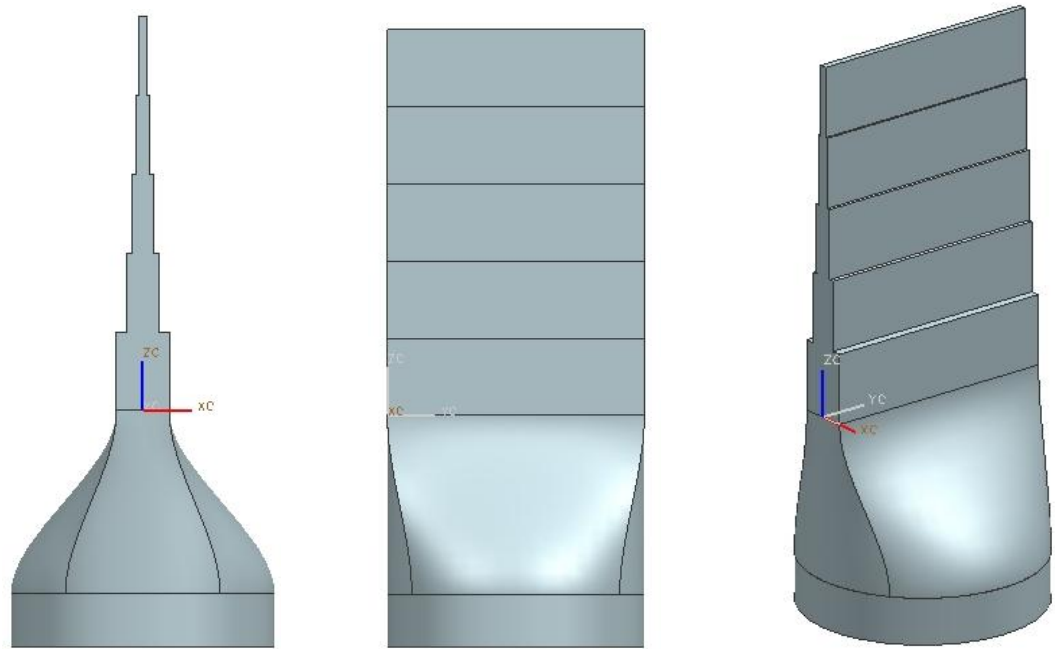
1. 3-D model of 5-step casting with the round-shape gating system (A)XZ view; (B) YZ view; (C) isometric view
